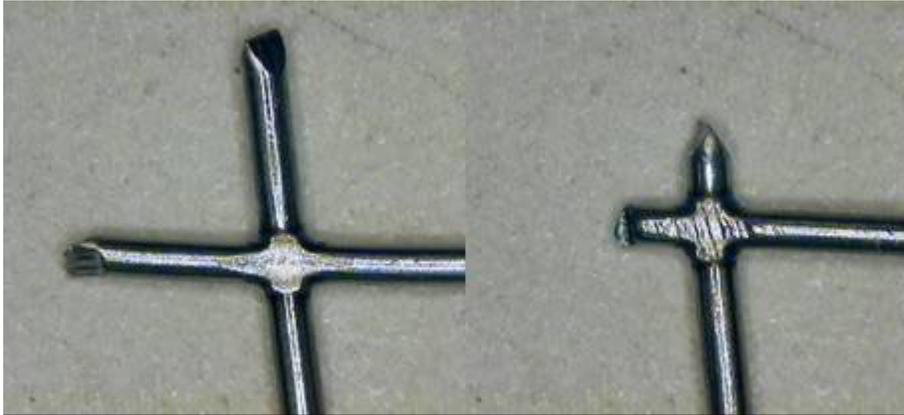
Photos of welds showing effect of weld location in welding of two 0.010" Ni wires. Weld on the left made away from the wire ends had an after weld stack height of 0.0195"; weld on the right near the wire ends had a stack height of 0.0185" indicating a hotter weld at the same weld settings.
